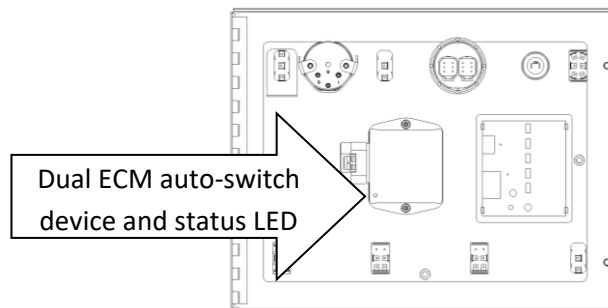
Clarke panel door (interior view), ECM auto-switch device
